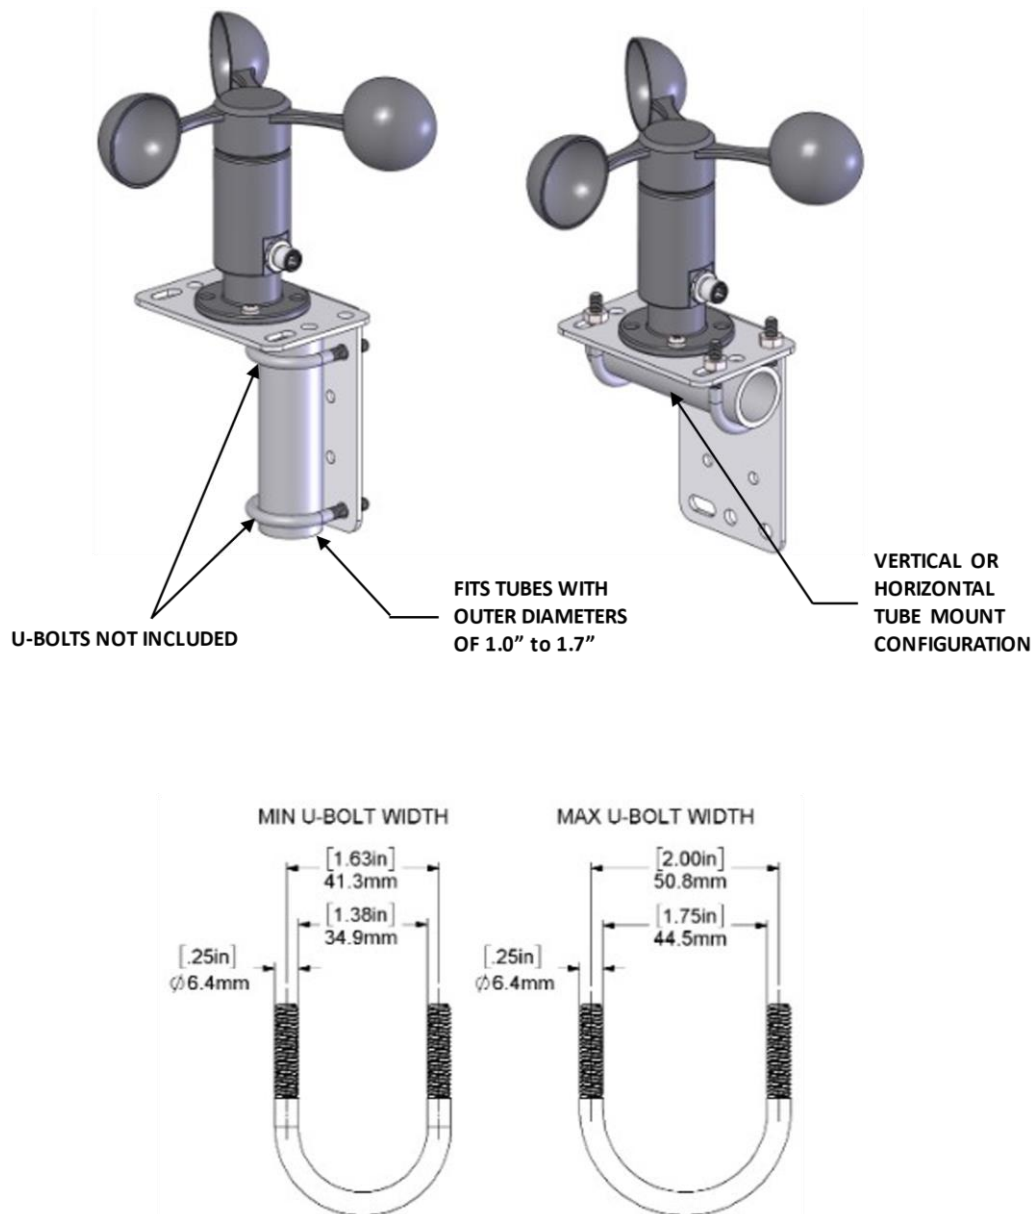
610635 Wind Sensor mounting plate, shown on tube mounts
